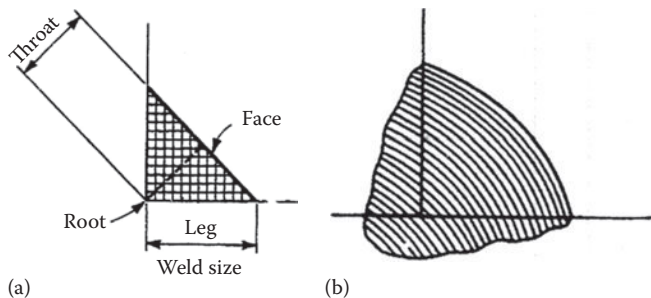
Fillet weld: (a) theoretical cross-section and (b) actual cross-section.
